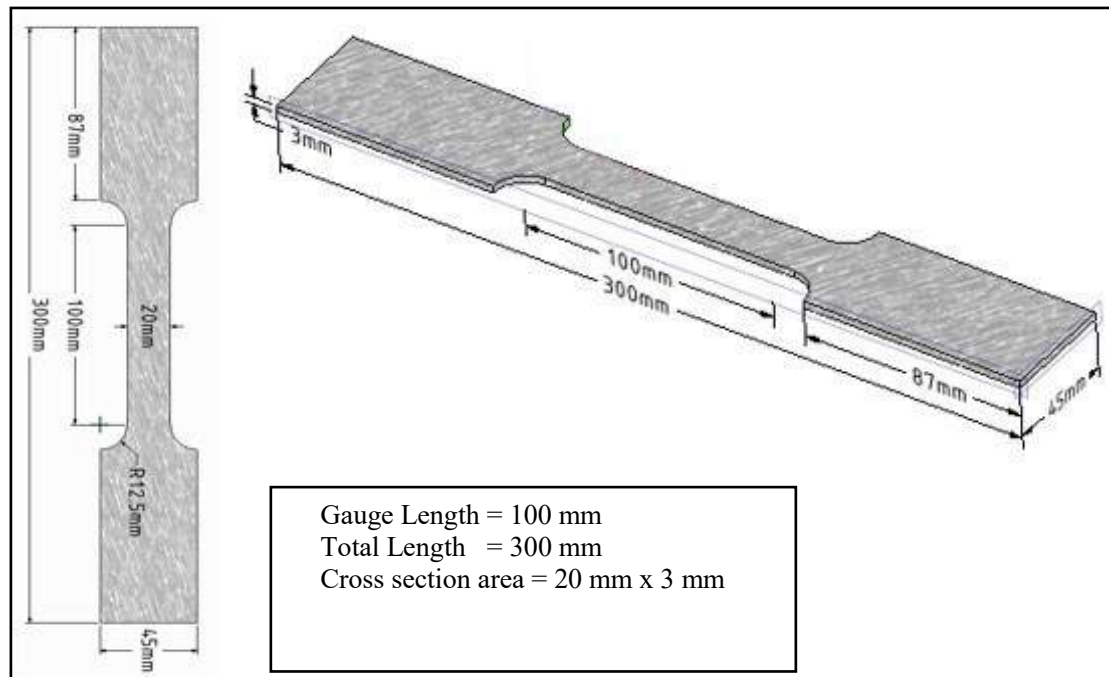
Dimensions for the aluminum plate and hybrid to be tested [38].
